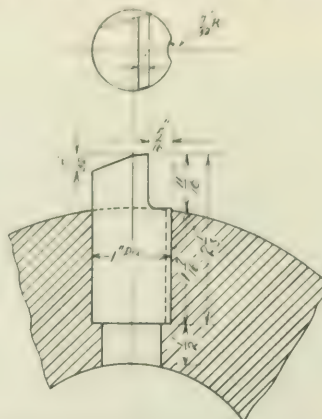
A—One of the Cutters in Milling Tool for Side Rods.
